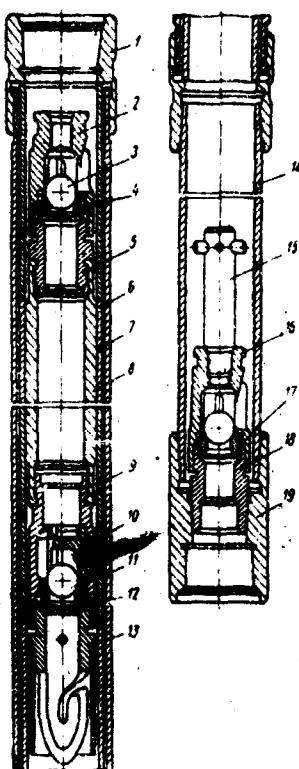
Deep-well rod pump: 1 - coupling of the cylinder; 2 - valve cage; 3 - ball; 4 - valve seat; 5 - nipple of plunger; 6 - bushing; 7 - housing; 8 - smooth plunger; 9 - housing of valve; 10 - valve sleeve; 11 - ball; 12 - valve seat; 13 - catcher; 14 - pipe-extension; 15 - rod-catcher; 16 - valve cage; 17 - valve seat; 18 - tip cone; 19 - cone seat.
